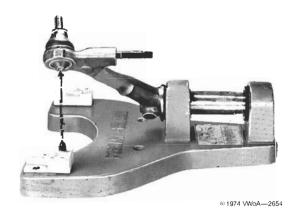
Late-type ball joint. Point on jig should contact test surface on ball joint. Torsion arm shown is not for a Type 2 vehicle.
